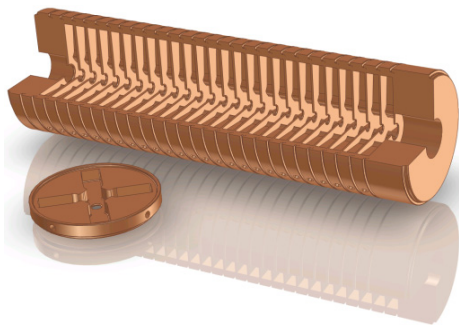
Example of an accelerating structure made of disks (one quarter removed) together with a single disk.
